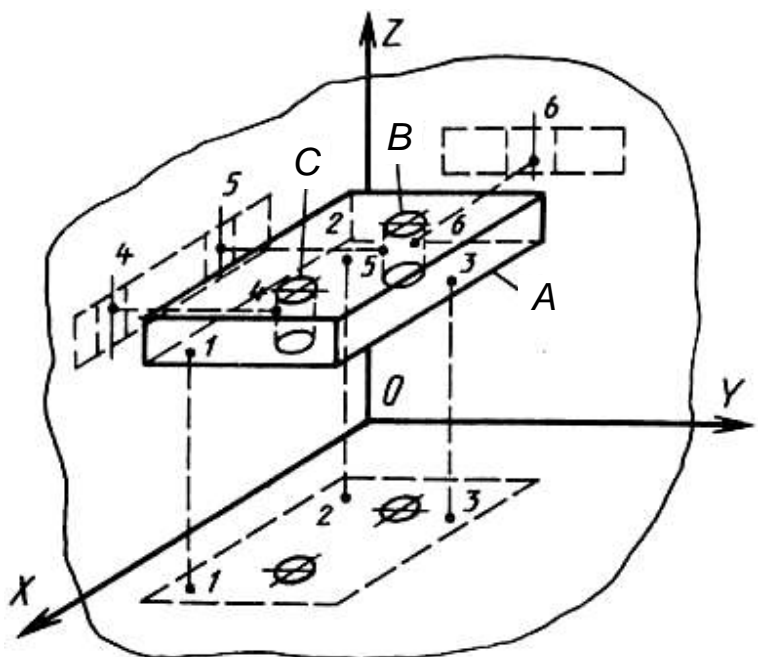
Theoretical diagram of workpiece locating on two holes and plane
